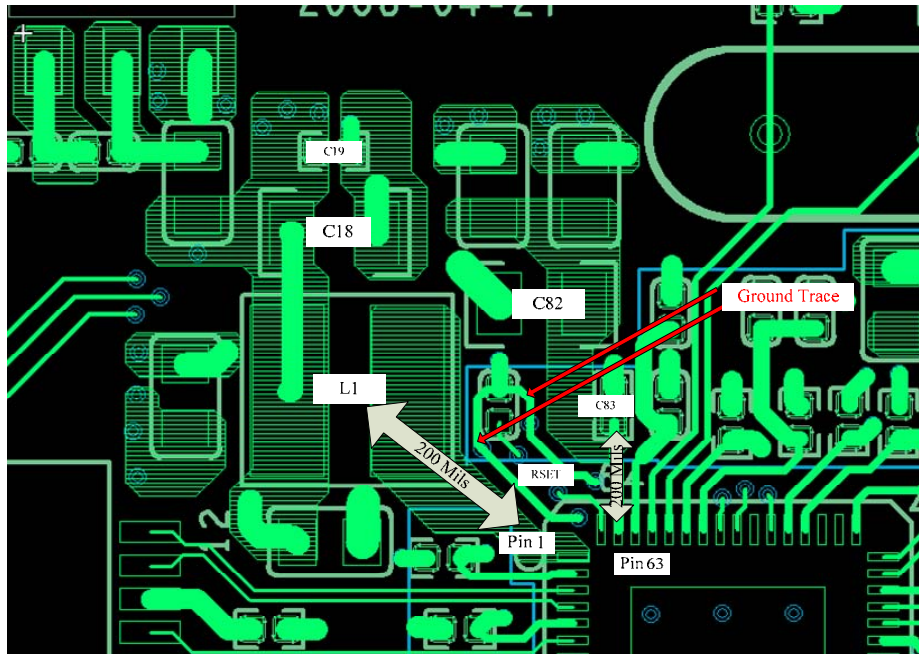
64-Pin Typical Switching Regulator PCB Layout (Top Layer)
